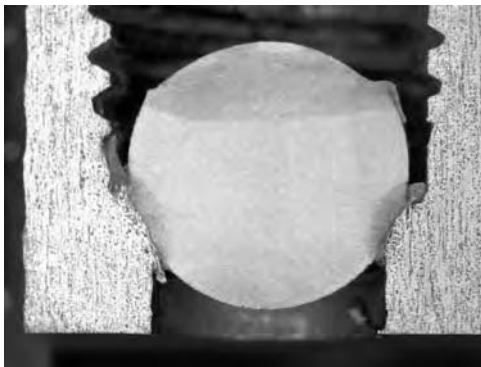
Example of ball-to-sheet weld. The ball bearing is larger than the hole it is being welded into. Courtesy of Edison Welding Institute
